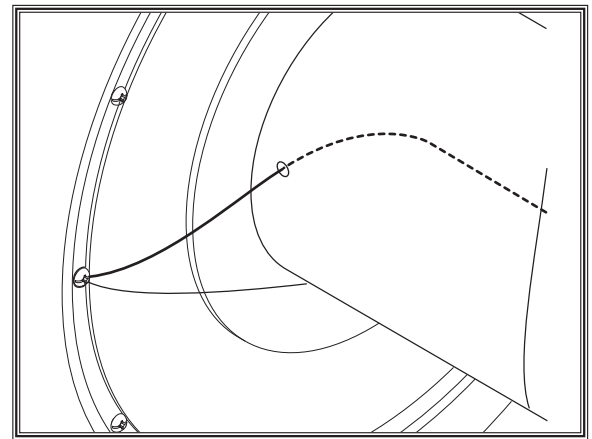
Typical dust collector impeller housing with ground wires secured to the housing.
